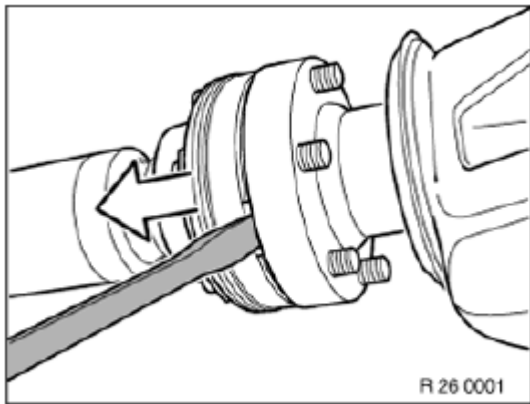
Pressing Constant Velocity Joint Off Drive Flange
